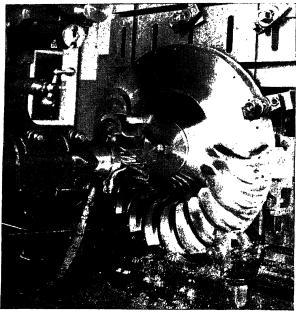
Cutting impeller blades from a single template. This shortens the time from the model impeller to the test rotor. (Keller.)
